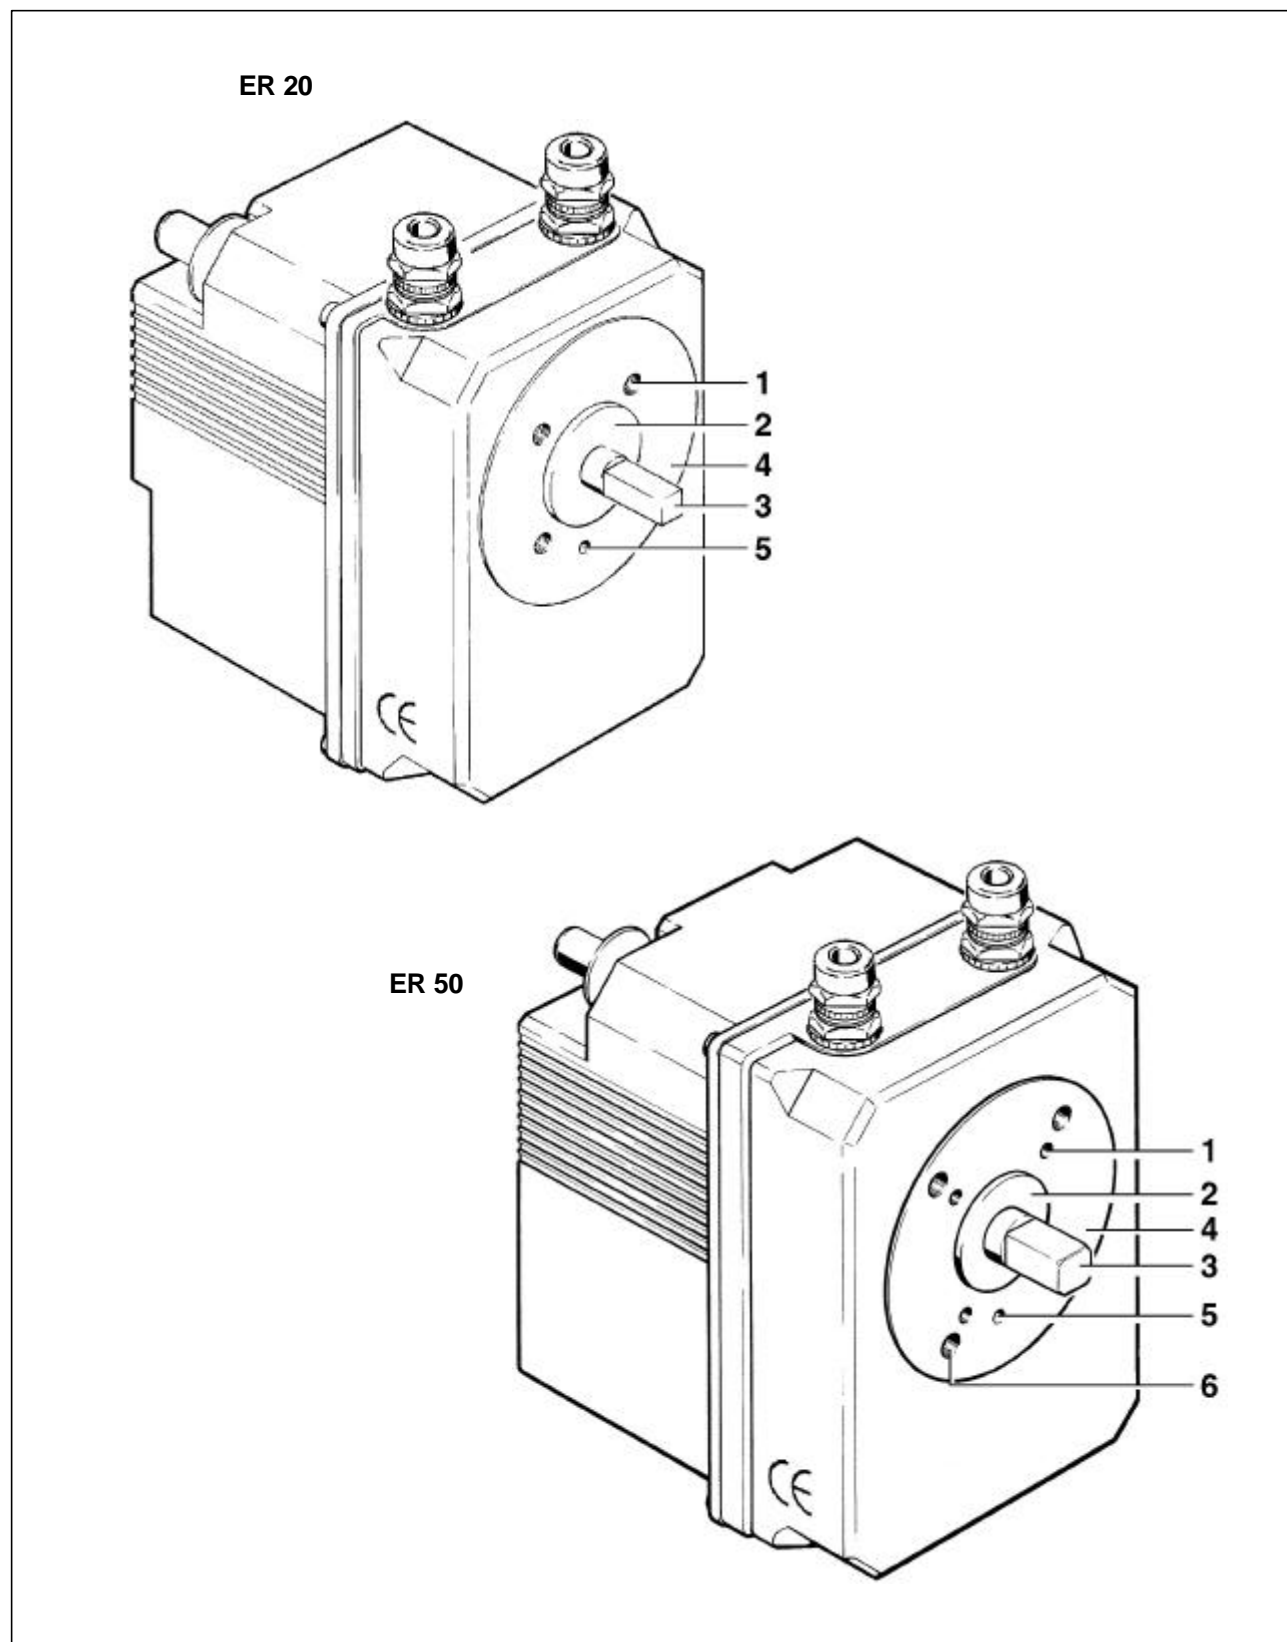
Position controller ER 20/ER 50 - rear view
